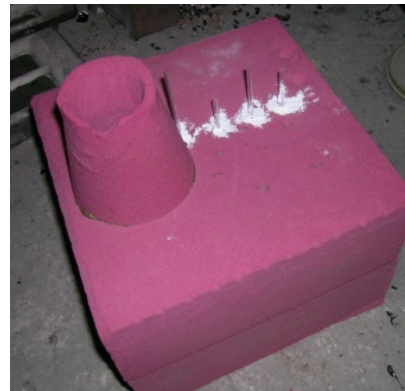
Ready for pouring and fully equipped mold for the technological “step” test with marked places where four thermocouples were assembled
